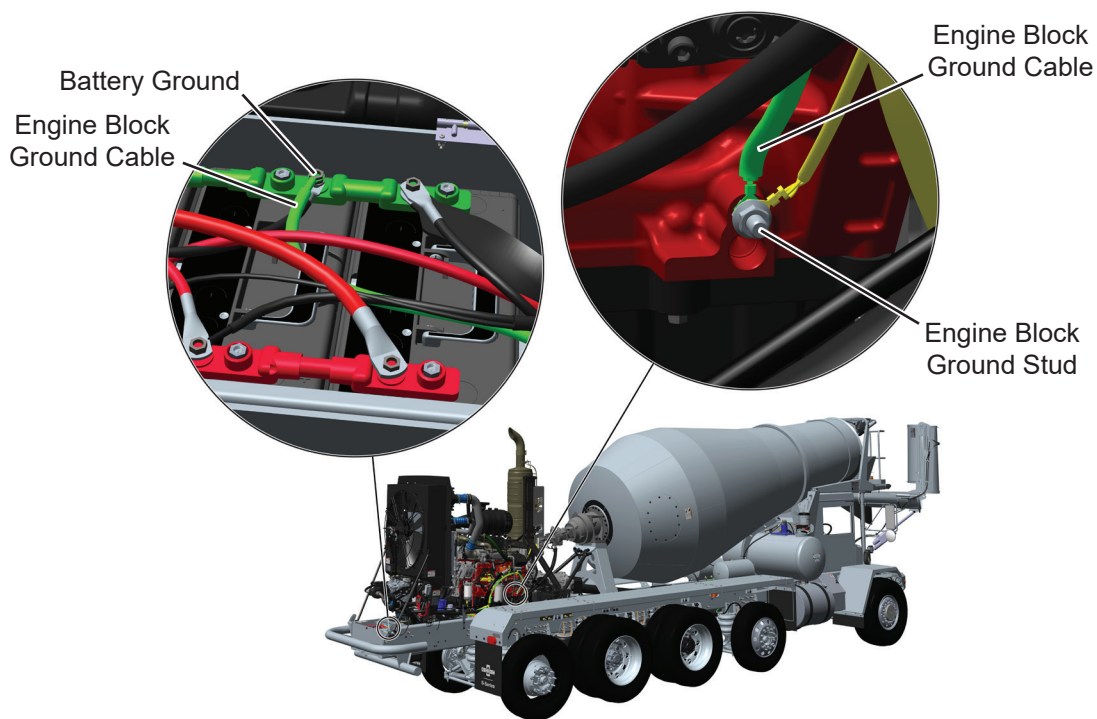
Engine Block Ground Cable - Hood Removed for Clarity
